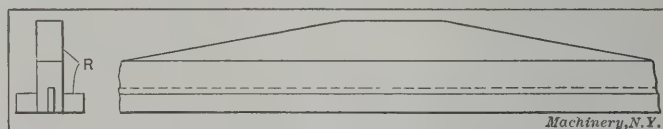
Method of Stiffening Steel Beam of Larger Calipers with Wood
